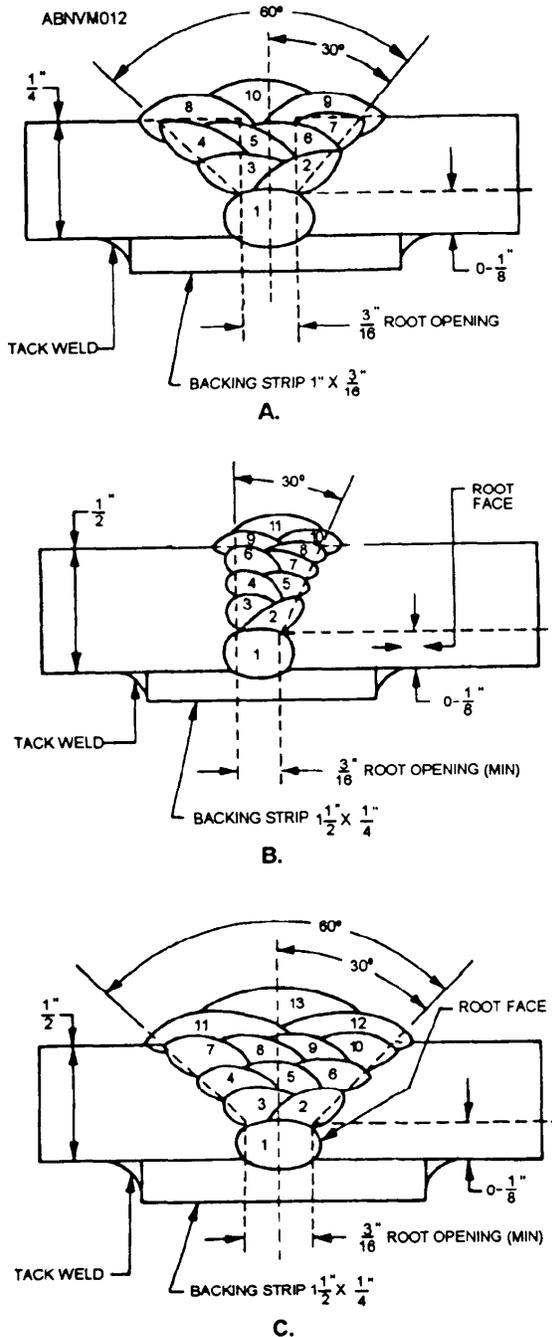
Use of backing strips in welding butt joints.
